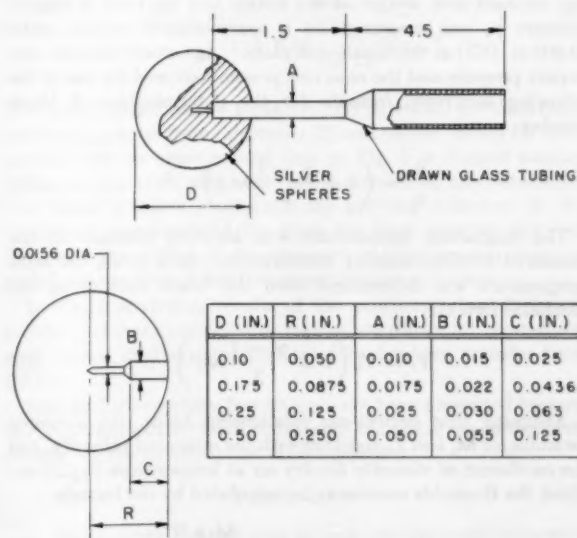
DIMENSIONS OF HEAT-TRANSFER SPHERES
